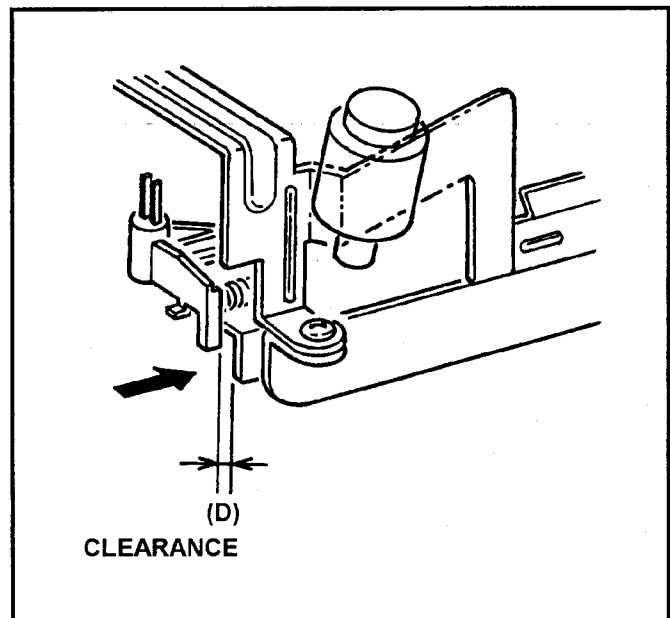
Cleaner Solenoid Position Adjustment
